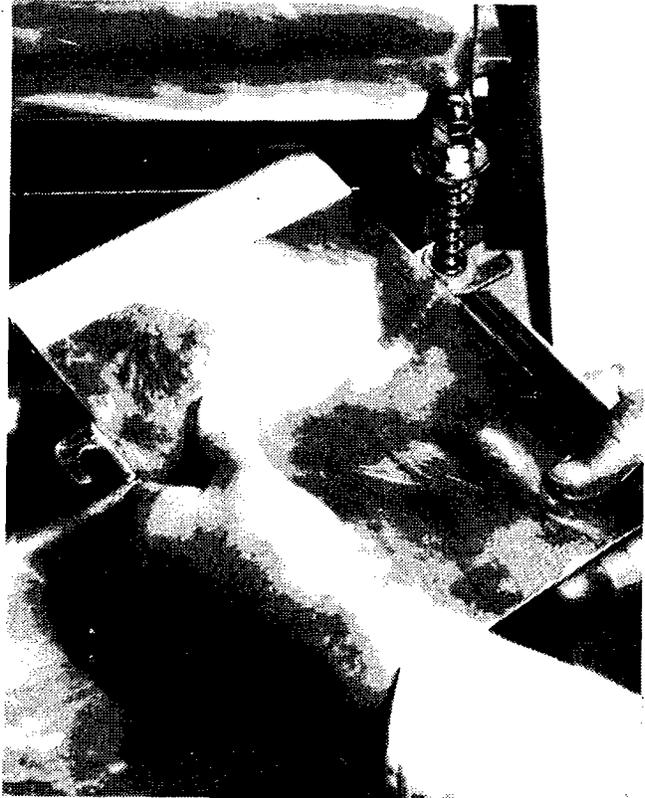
Removing Short Bottom Scraper Slide and Tip.
